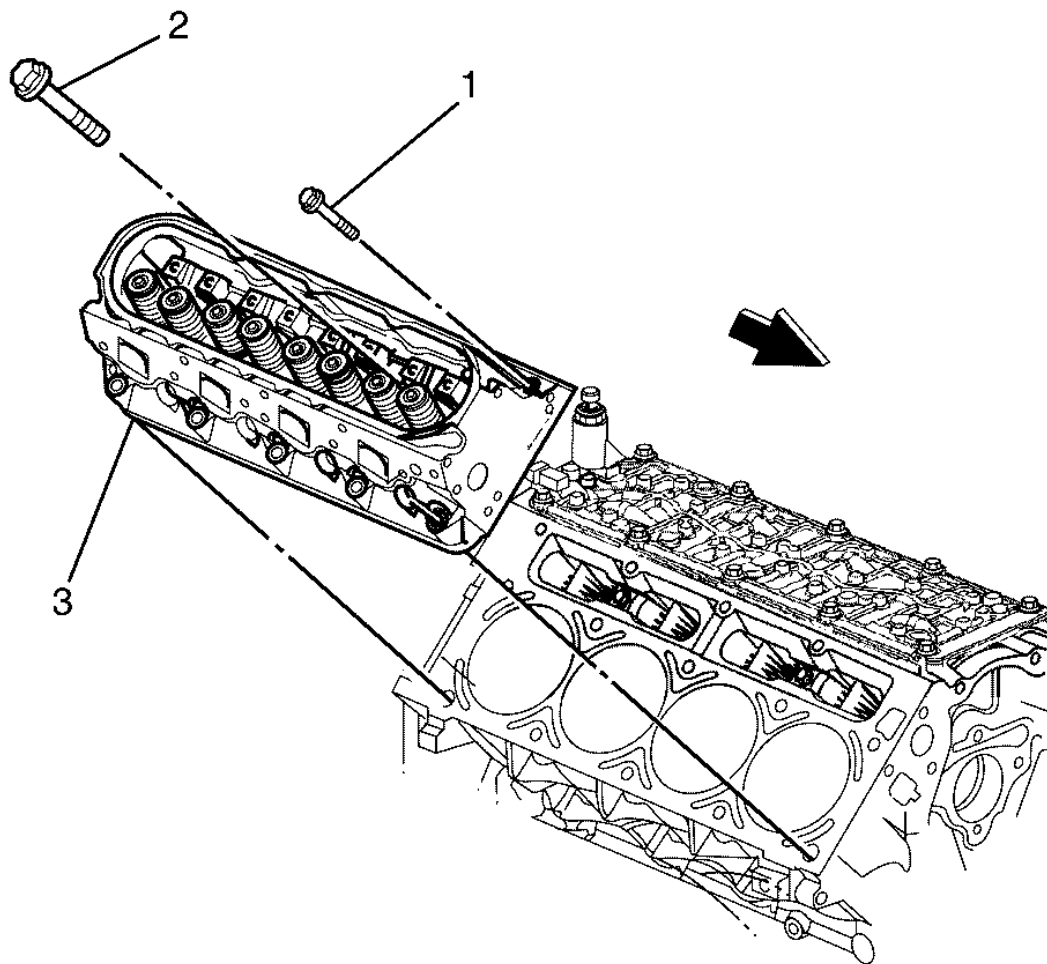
Identifying Cylinder Head & Bolts (Right Side)
